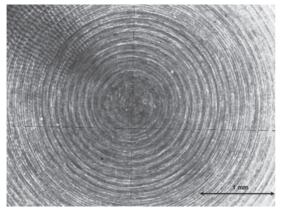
Part after toolpath 2 (enlarged 30-times)
